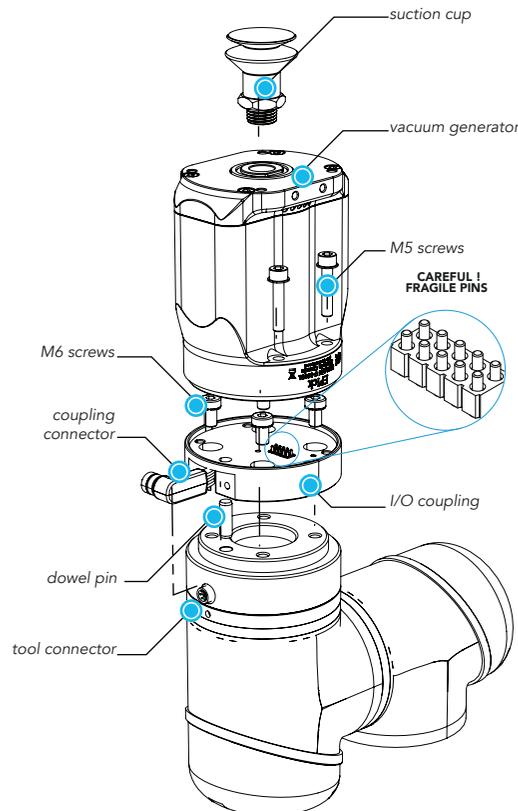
EPick wrist connection kit exploded view, on robot arm.
